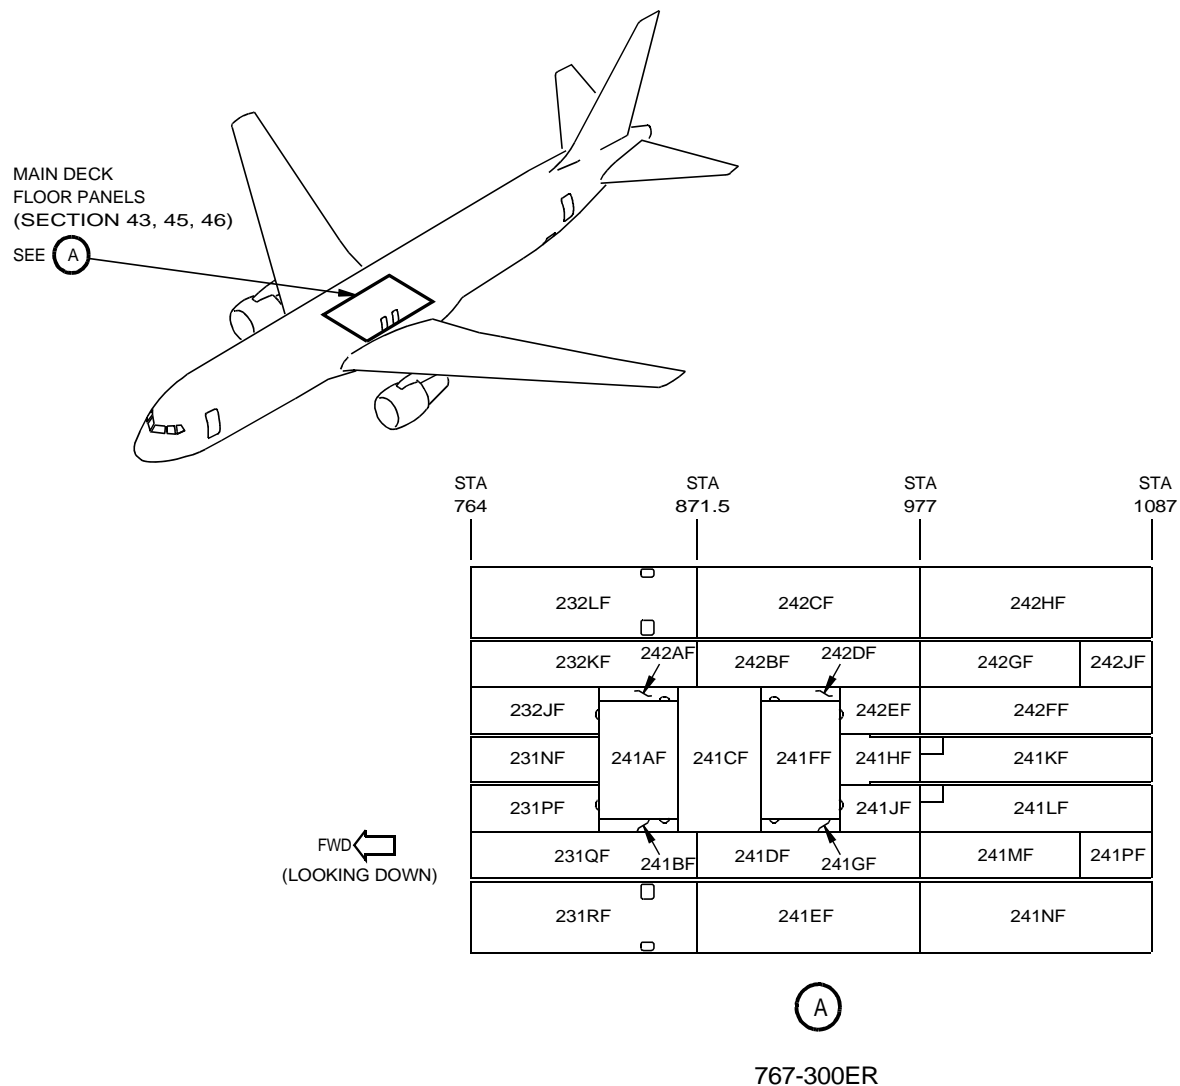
SUB-MAJOR ZONE 231/232, 241/242, 251/252 MID-PASSENGER COMPARTMENT FLOOR PANELS
